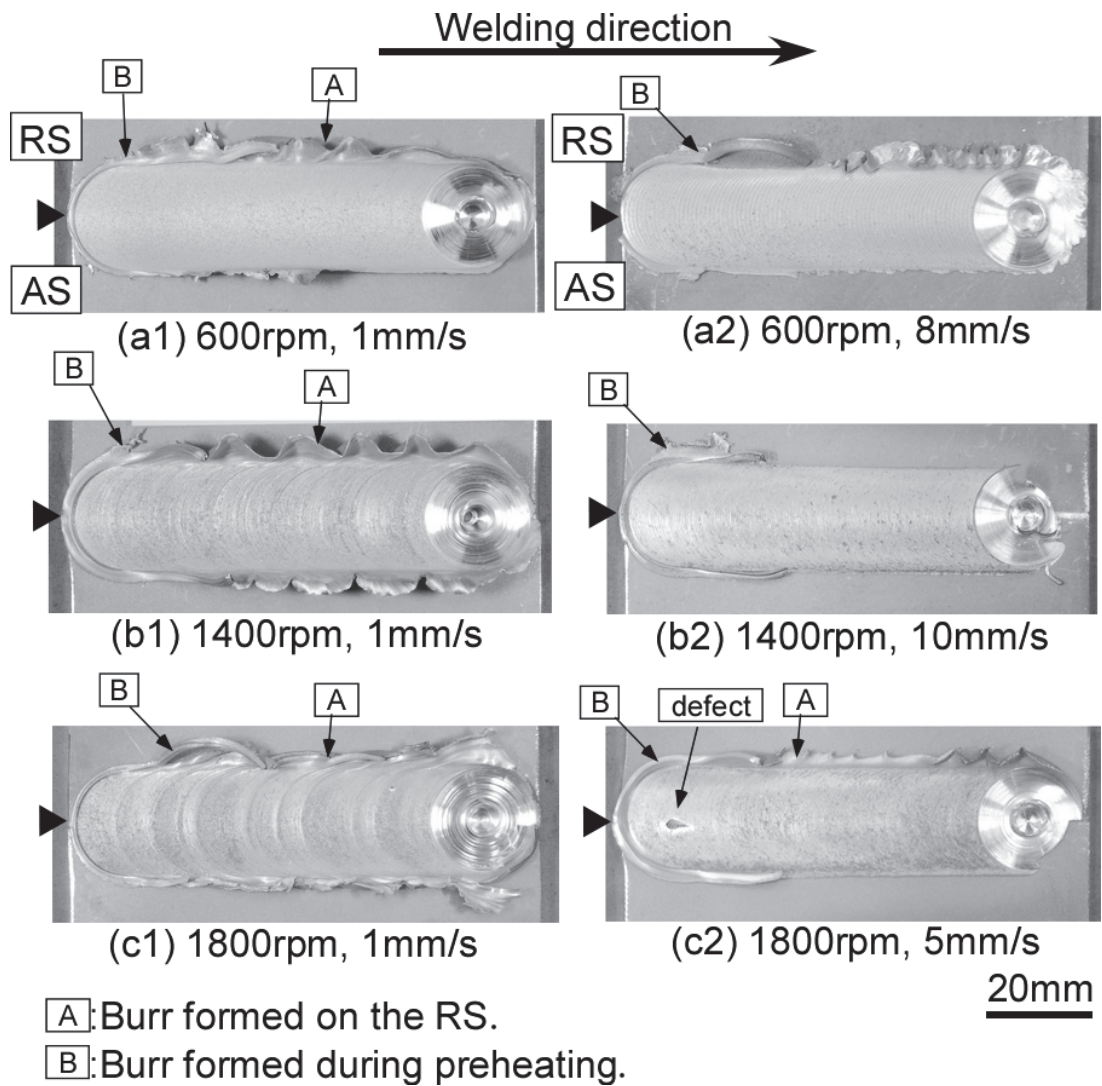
Appearances of FSW joints welded under various conditions.
